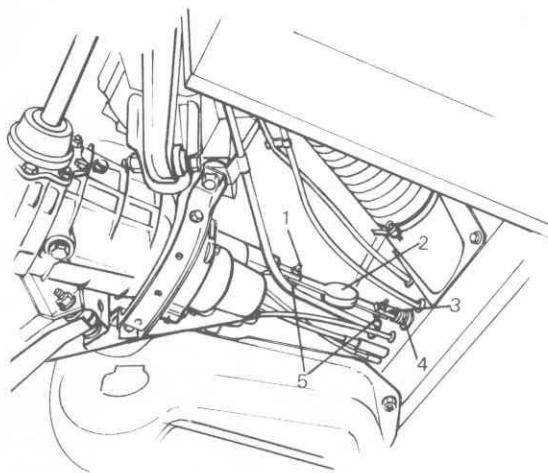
16 Underneath view showing connection between gearlever shift rod and gearbox
